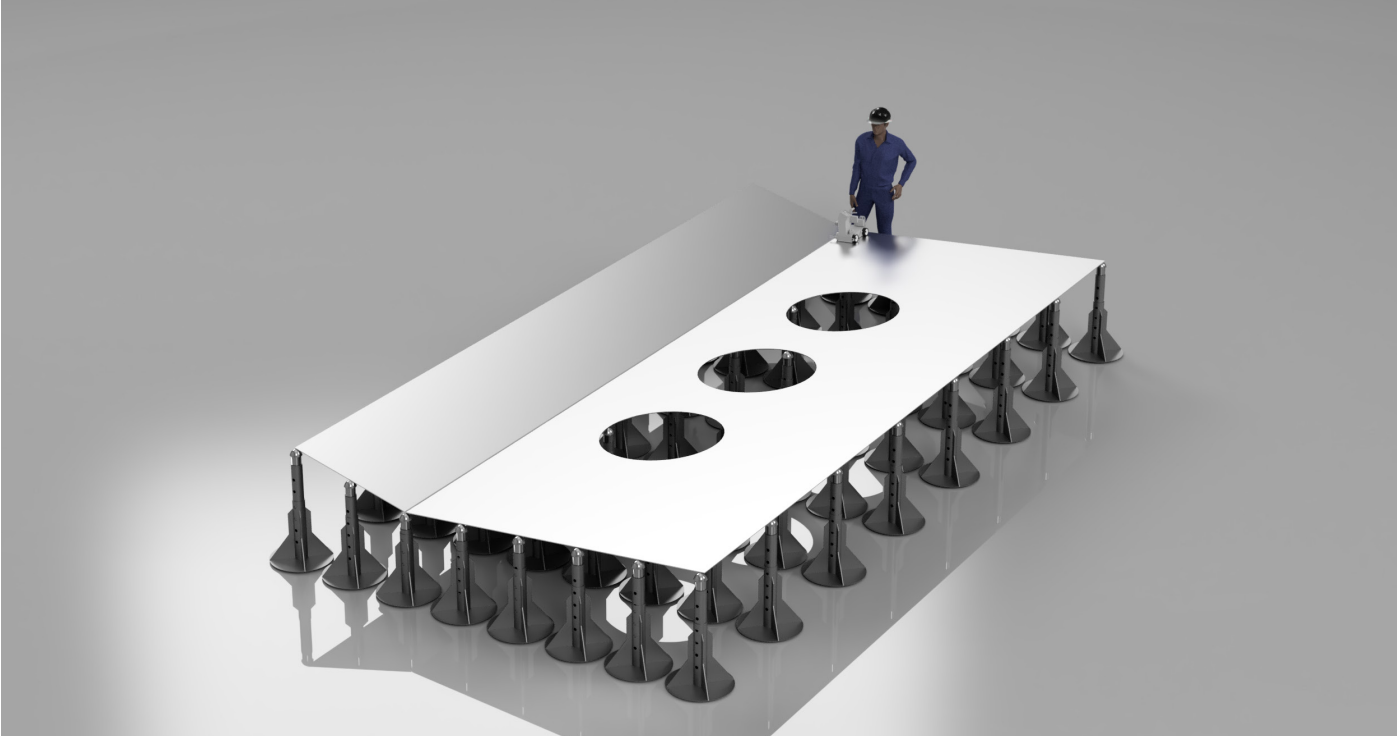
The pin jig with two hull plates laid on it, ready to be welded by the welding buggy.
